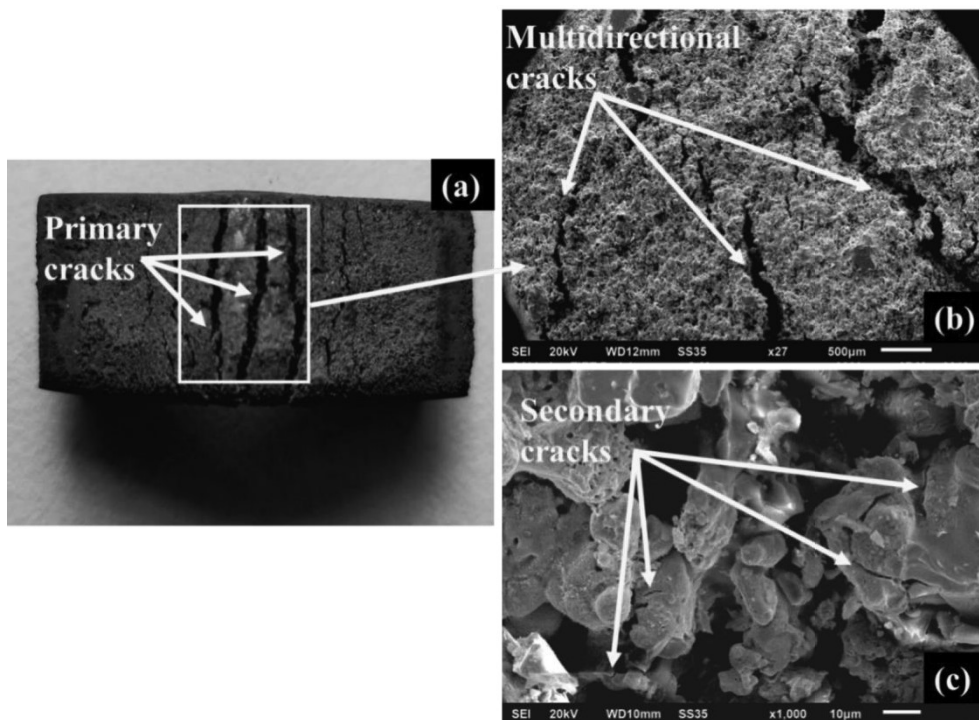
Fractured EWAC-30WC10Co2Ni clad specimen after 3-point bend test
